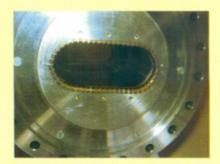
RF-shielded bellow assembly for Indus-2
